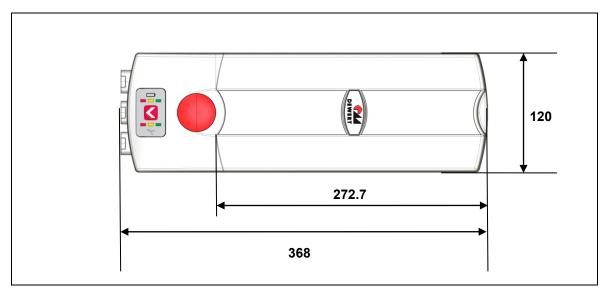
Dimensions of the ACCUCONTROL, top view (in mm)
